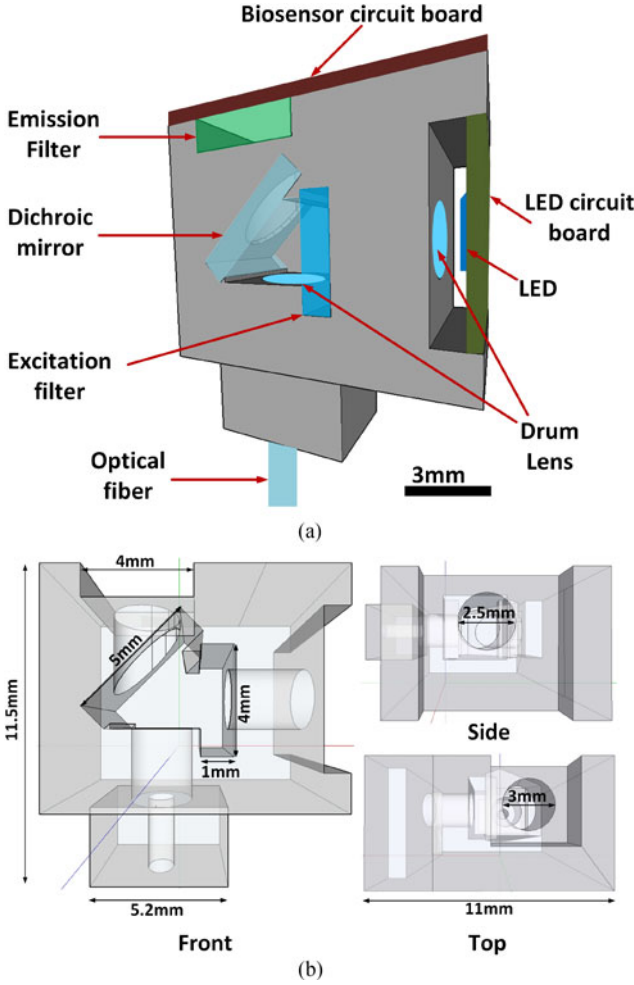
The head mountable fiber photometry system. (a) Perspective view of all its components, (b) front, side, and top views of the plastic housing.
